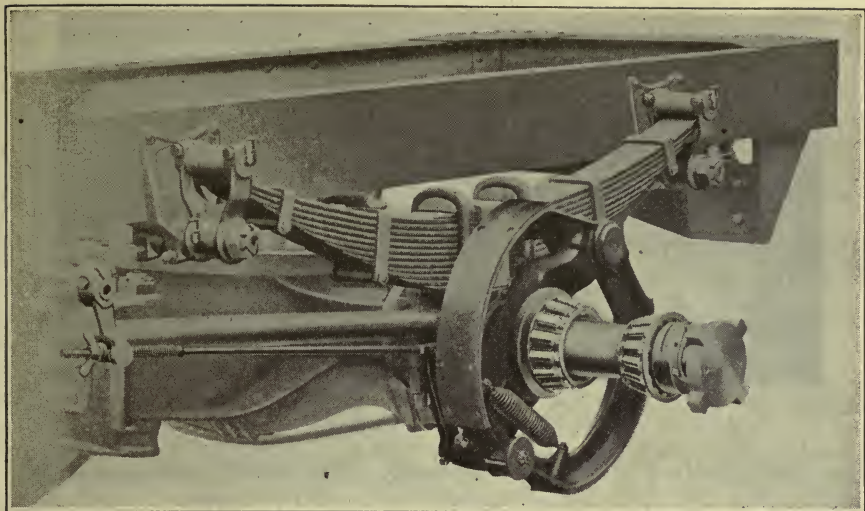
Rear of Packard Truck Chassis, showing frame and spring suspension.
